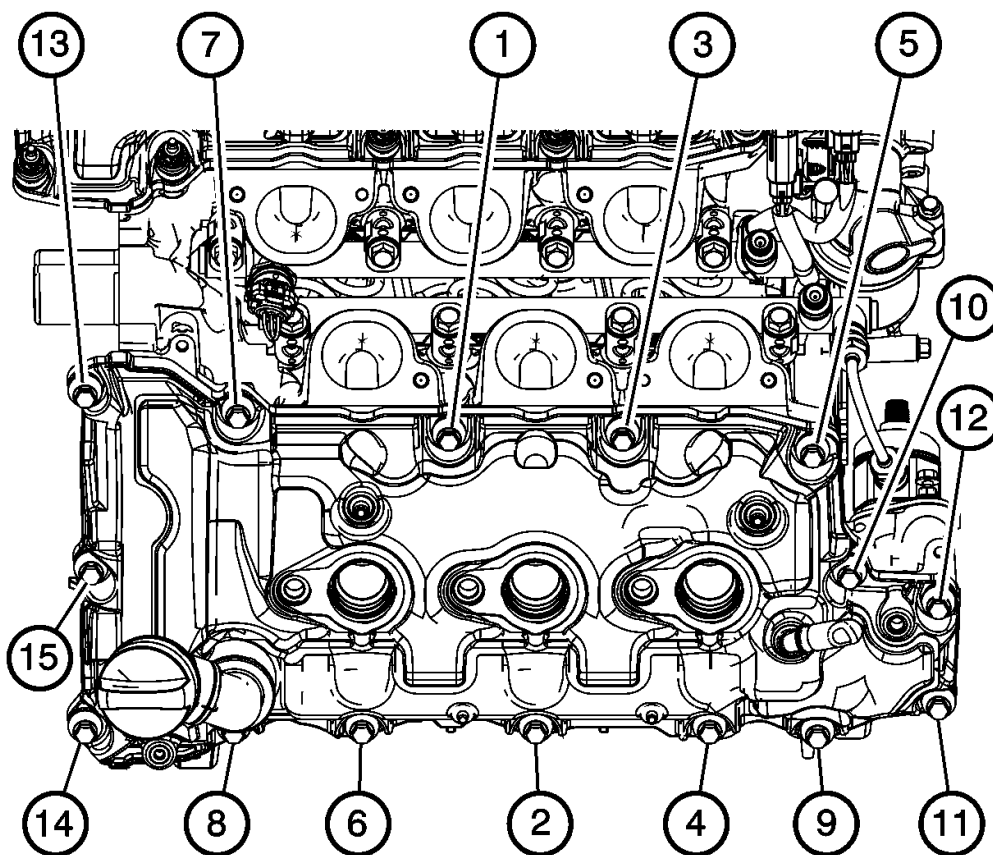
Identifying Left Camshaft Cover Bolt Tightening Sequence
